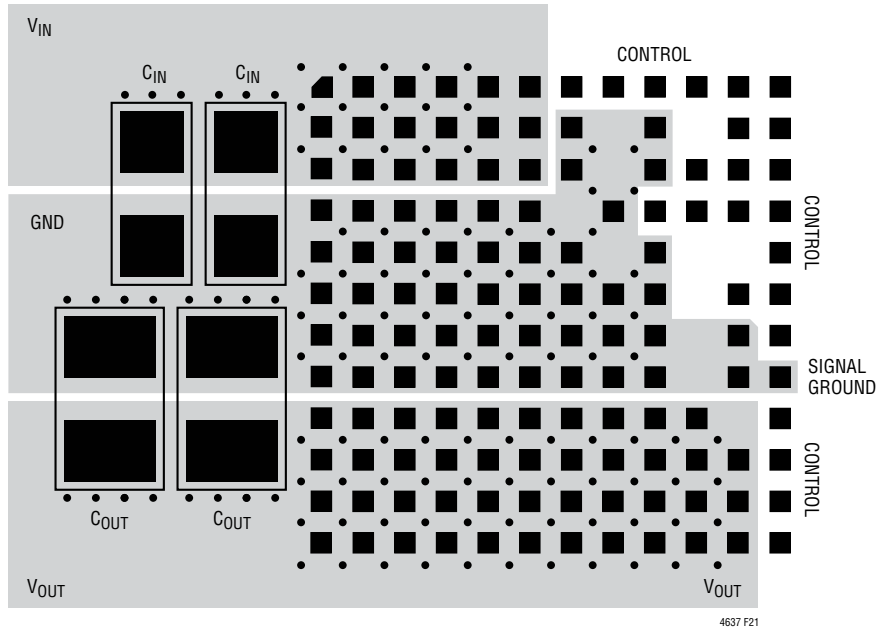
Recommended PCB Layout (LGA Shown, for BGA Use Circle Pads)
